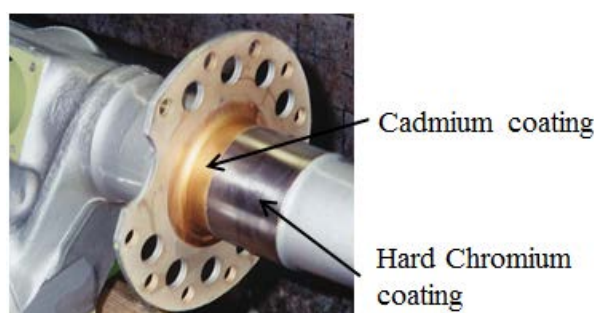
A landing gear component with EC and EHC coatings in physical contact¹
